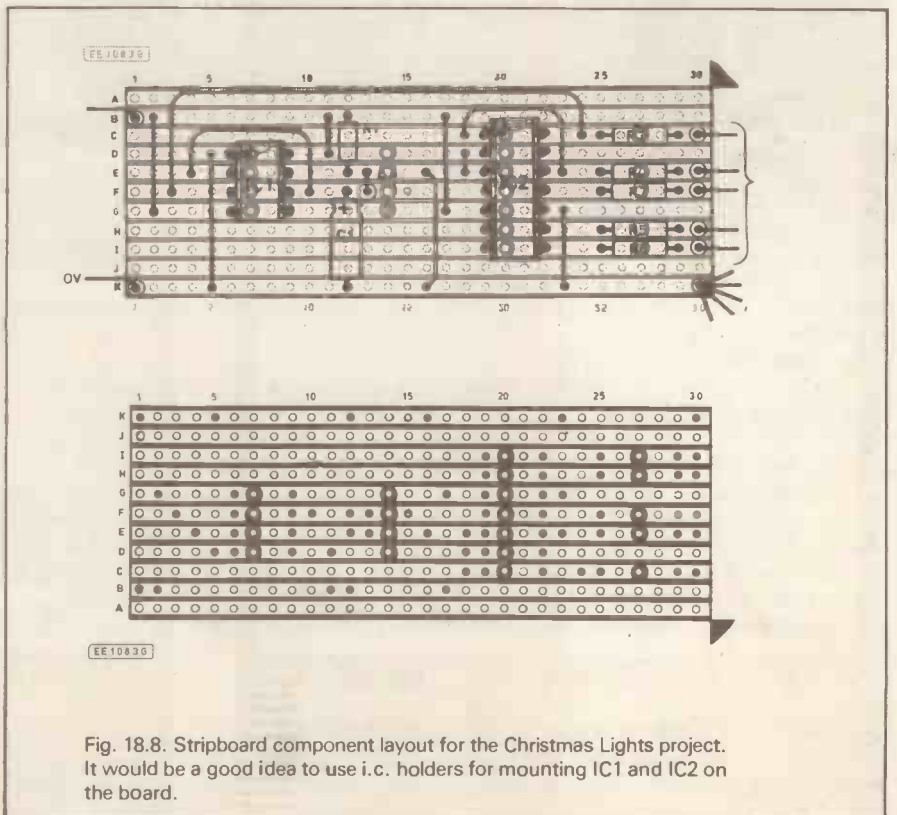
Stripboard component layout for the Christmas Lights project. It would be a good idea to use i.c. holders for mounting IC1 and IC2 on the board.
